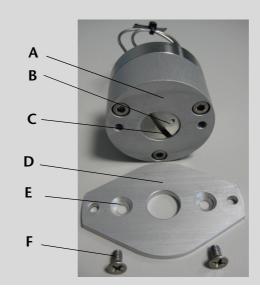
Back side of the electrical valve – adapter plate for mounting
